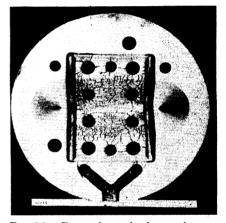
Coarse heat checks on the surface of a die used to cast small brass parts.
